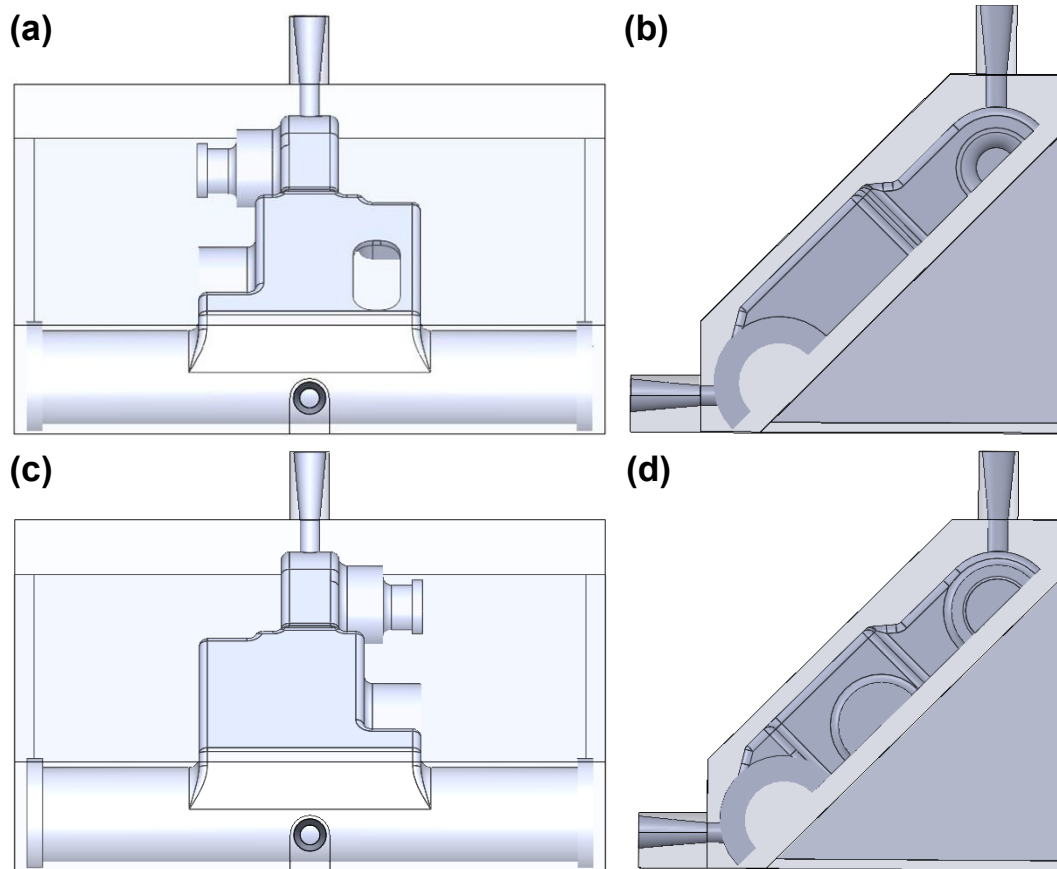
Bus bar cover assembly mold: (a) bus bar cover assembly Part 1 mold front view, (b) bus bar cover assembly Part 1 mold side view, (c) bus bar cover assembly Part 2 mold front view, and (d) bus bar cover assembly Part 2 mold side view.
